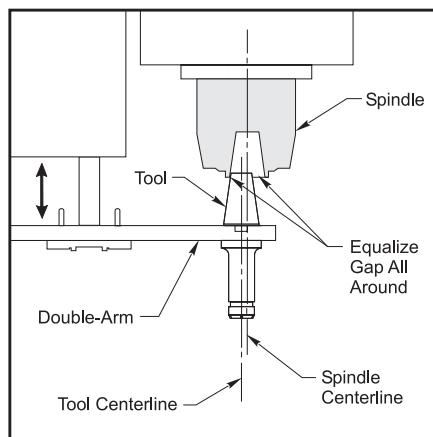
Double Arm to Spindle Center Alignment, along the Y-axis.
